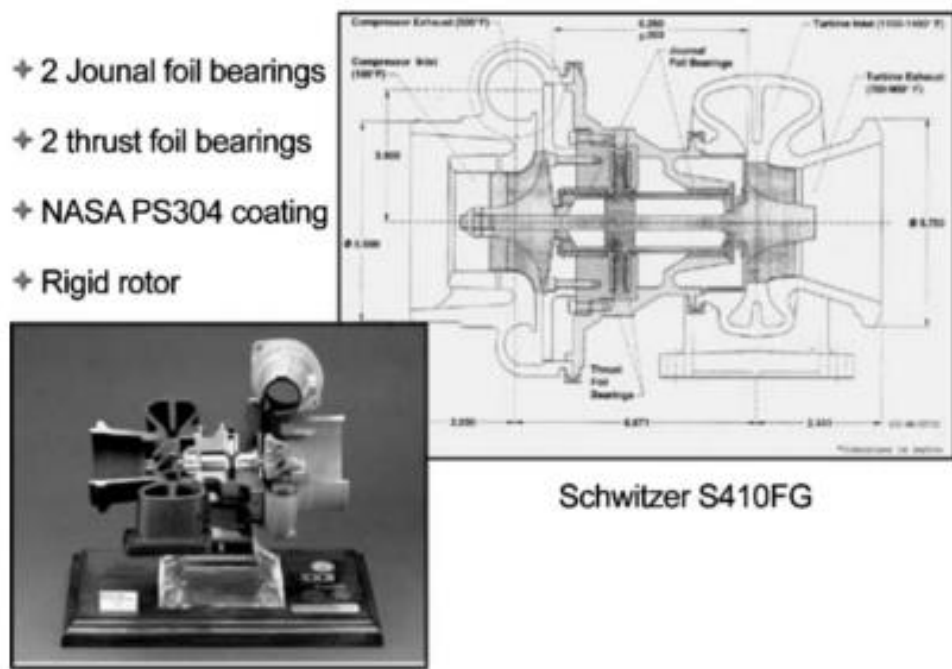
Section view for NASA turbocharger supported by journal and thrust foil bearings [7]
